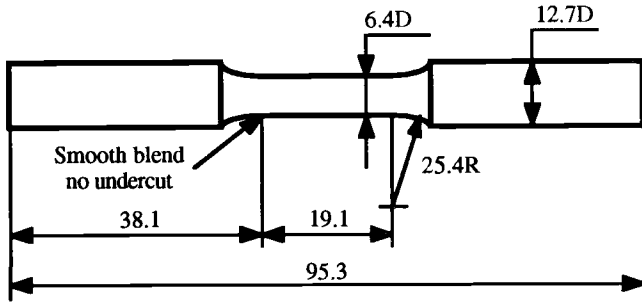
Axial specimen for monotonic tension and strain-life tests (all dimensions in millimetres).
